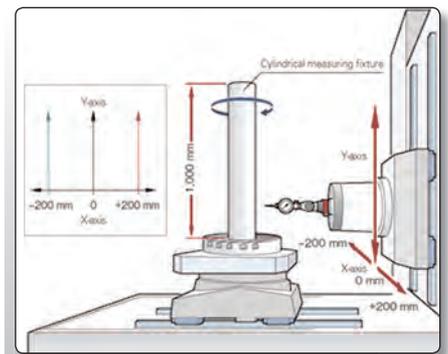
Measuring of the accuracy (straightness) of the Y axis [Dixi Machines]
